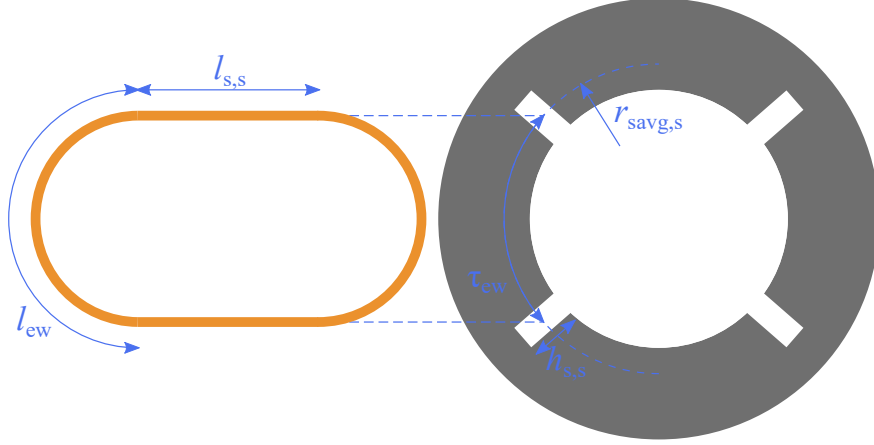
Dimensions of a coil with end-winding circular shape.
